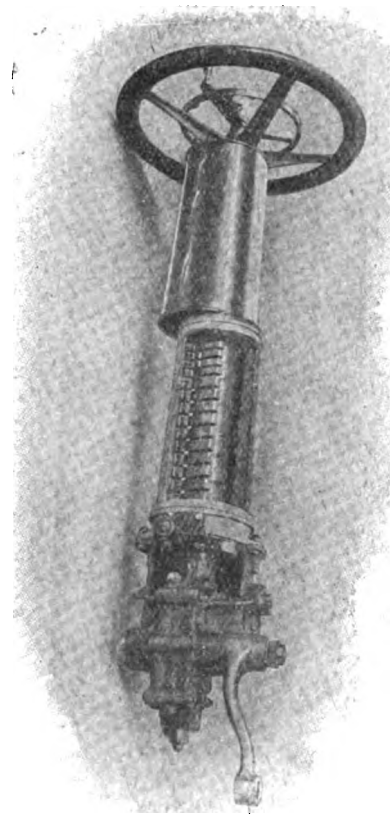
STEERING PILLAR AND MAIN CONTROLLER, WITH COVER RAISED.
